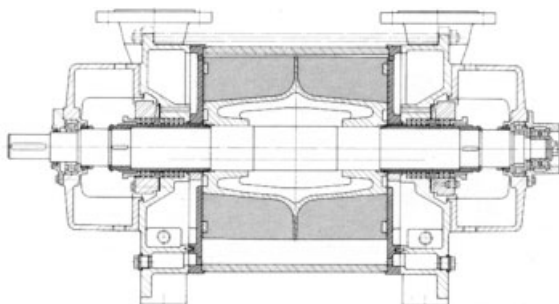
Liquid ring machine with stuffing box shaft seal (acc. to Siemens)
